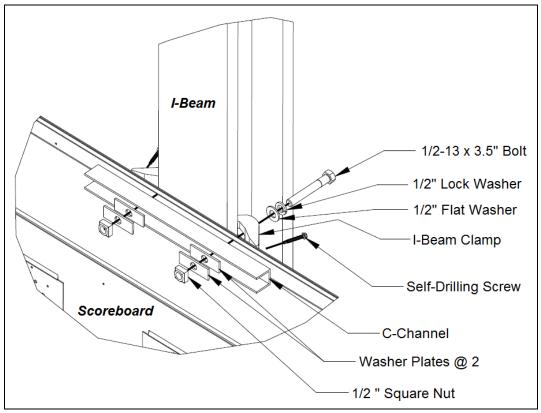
I-Beam Clamp Mounting Method, Front Rotated View
